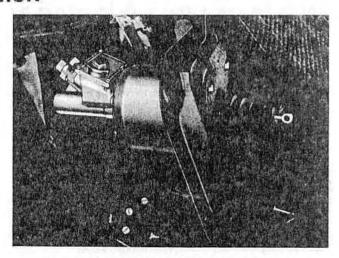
Power Unit and Toe Board Plate Ready for Installation
